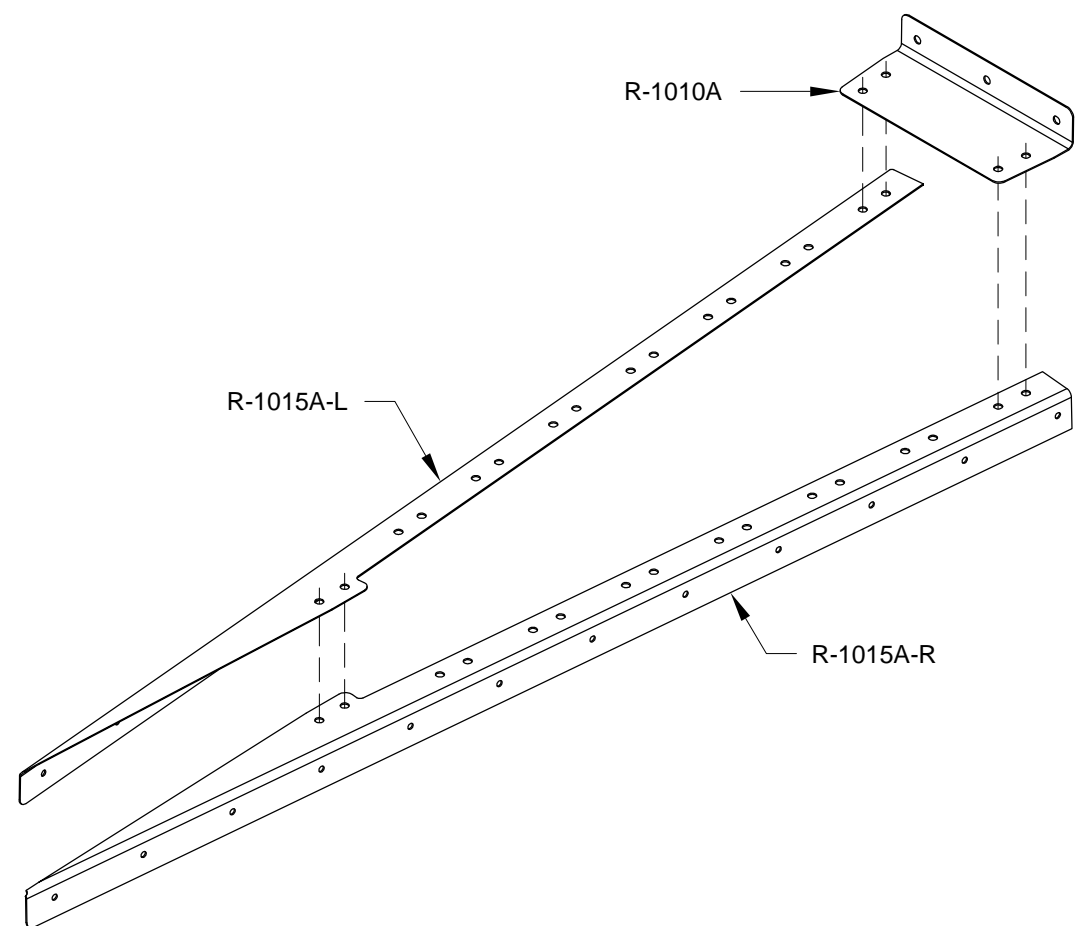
TYPICAL SHEAR CLIP/ STIFFENER ASSEMBLY
